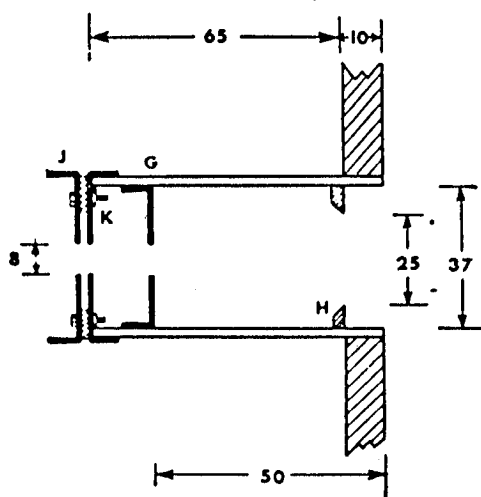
Eyepiece of the viewing box (dimensions in millimetres)
